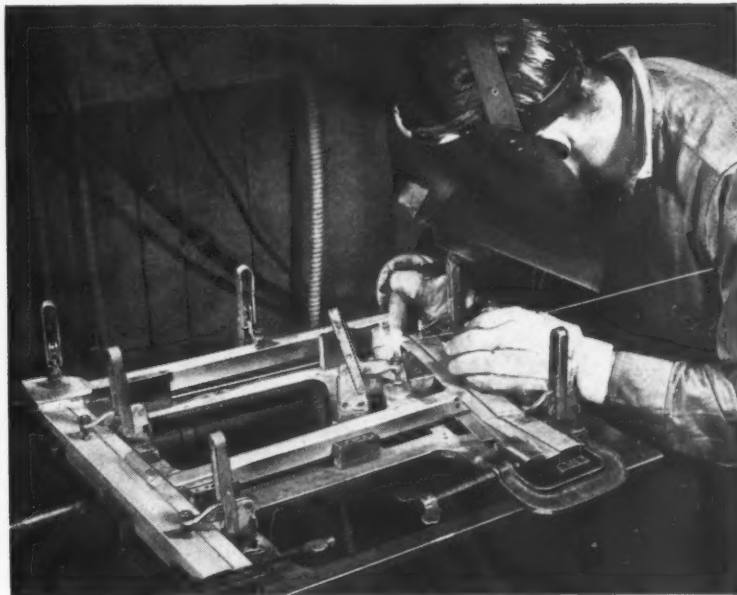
Fabrication of an Aircraft Seat Frame Made from Magnesium, Using the Heliarc Welding Process
